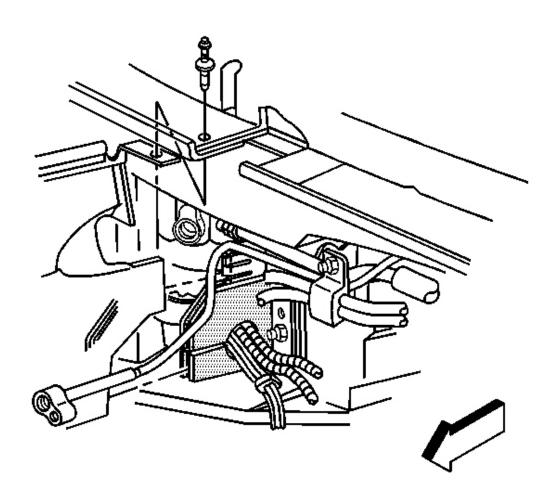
View Of Upper Plenum Heat Shield Retainer Courtesy of GENERAL MOTORS CORP.
